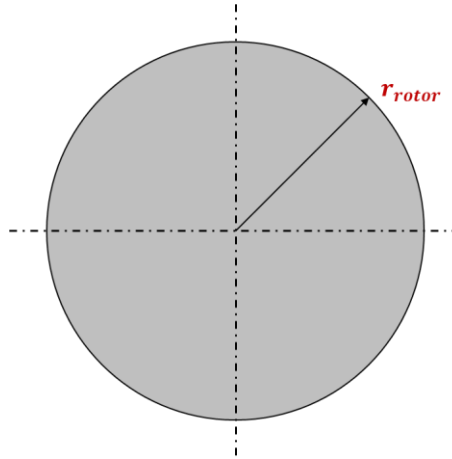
Graphics of the Rotor Pad of the Micro Thrust Bearing
